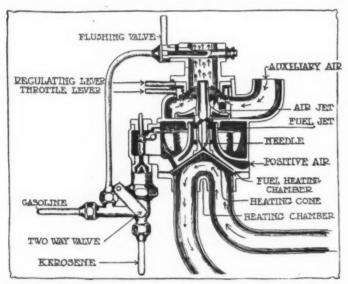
Sectional view of carbureter, showing exhaust by-pass and thin conical heating chamber connecting the float chamber with the spray nozzle. Flushing valve is shown at the entrance to the intake manifold. This valve supplies gasoline for running the engine until it gets warm enough to operate on kerosene
